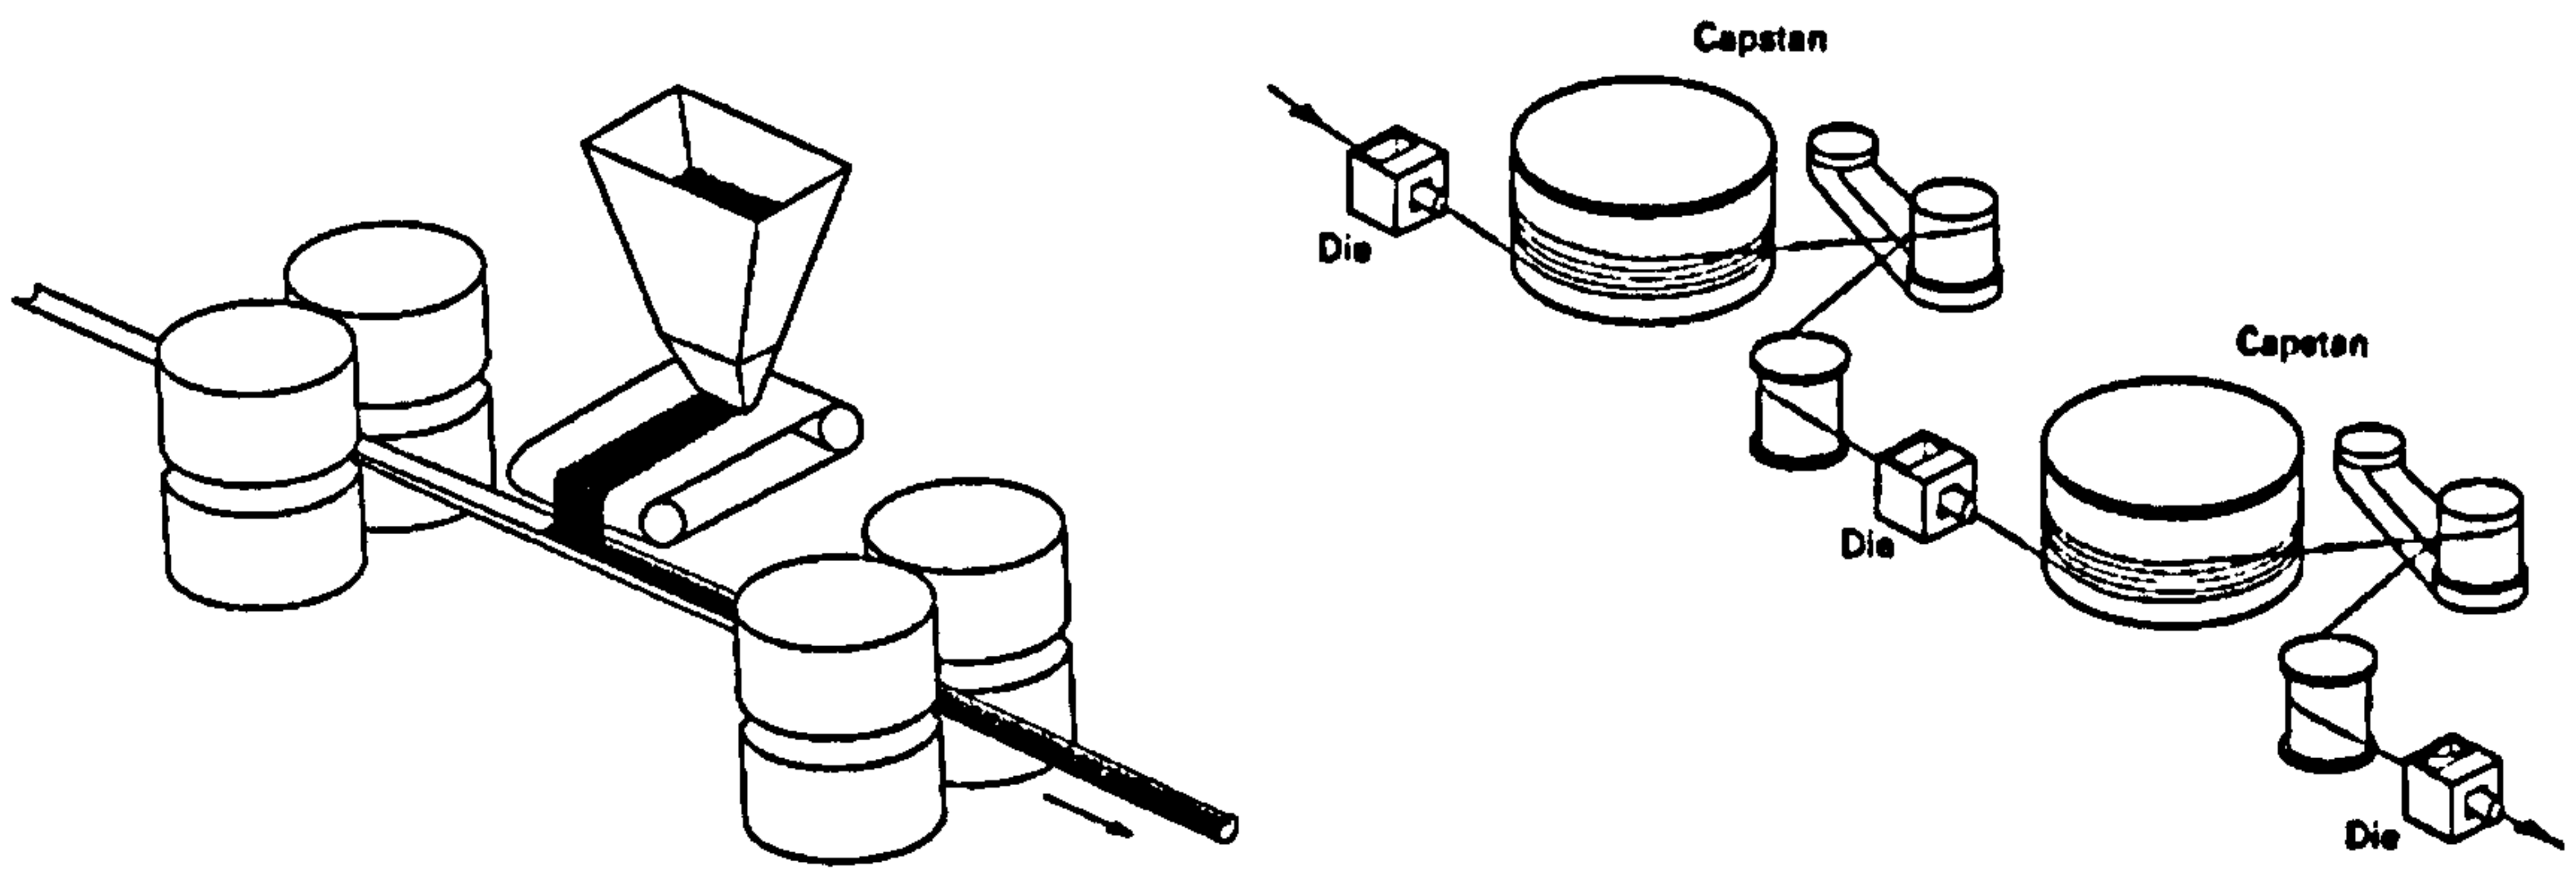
'Form, fill and draw' route for tubular wire production (after ref. 110)
